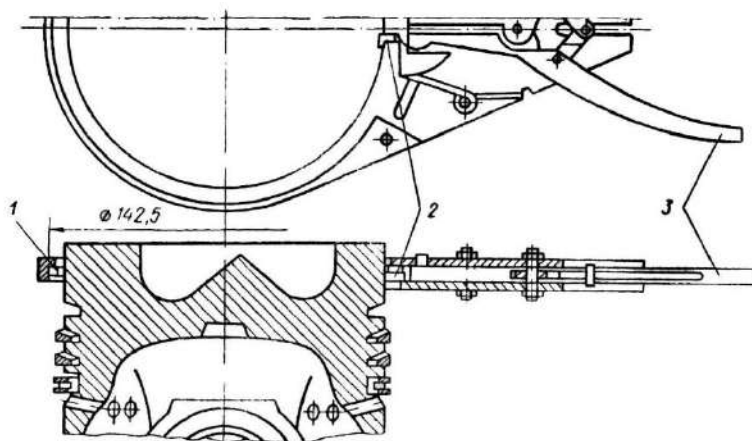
Device to remove and set piston rings: 1 – piston ring; 2 – sponges; 3 – handle
